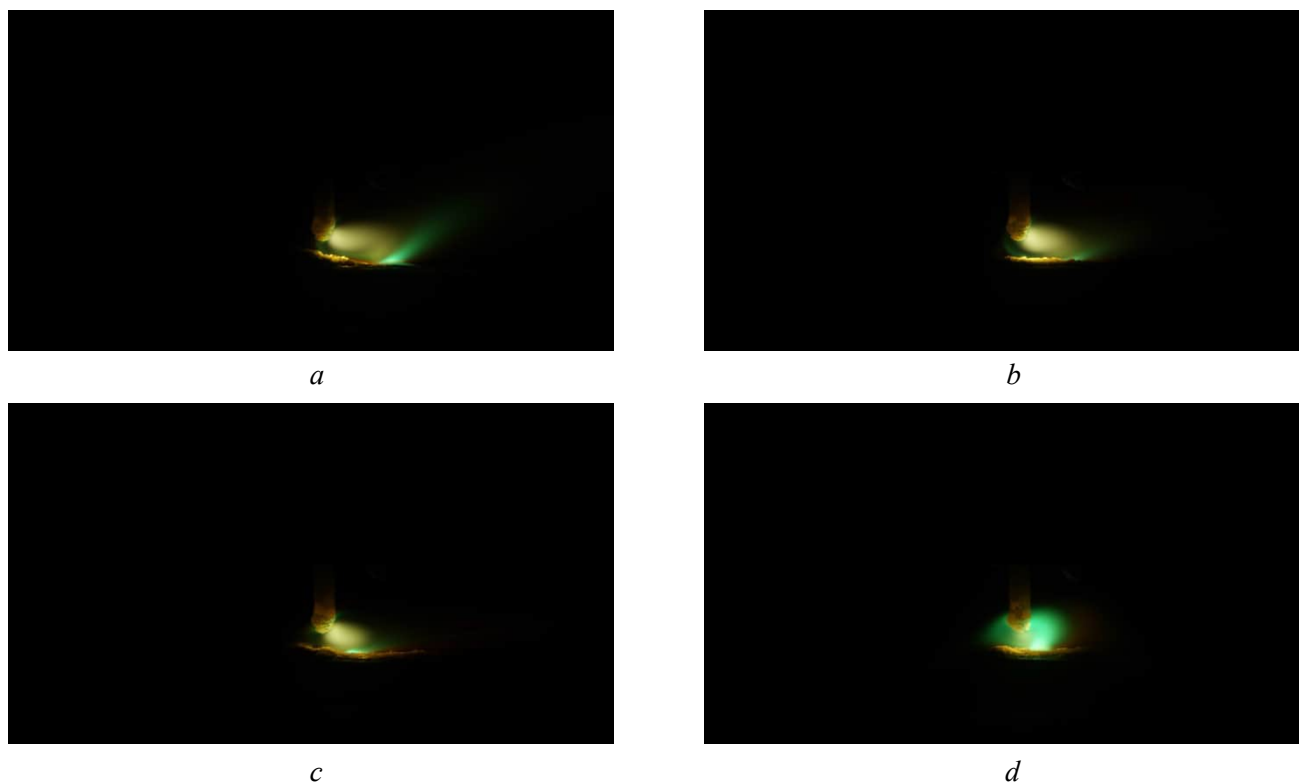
The process of welding steel *St3* with TiO_2 C flux applied in a 0.05 mm layer using a bonding varnish:
